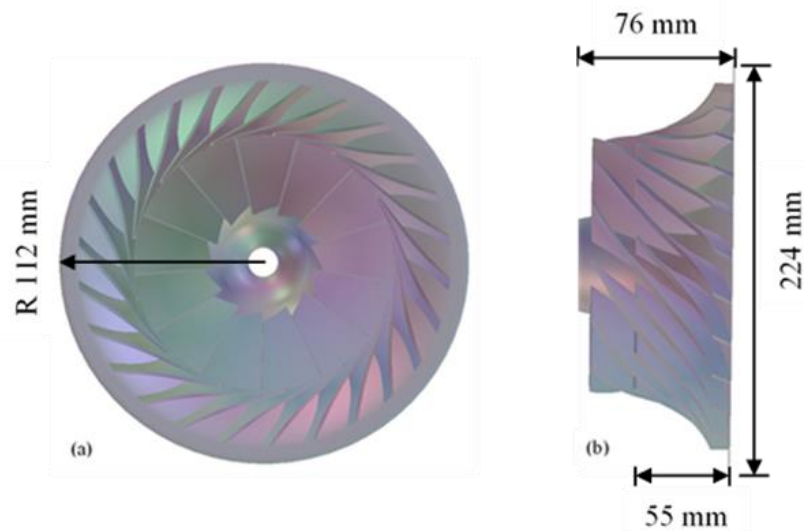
BladeGen Module Impeller Geometry for CFD analysis (a)Front View (b)Side View
